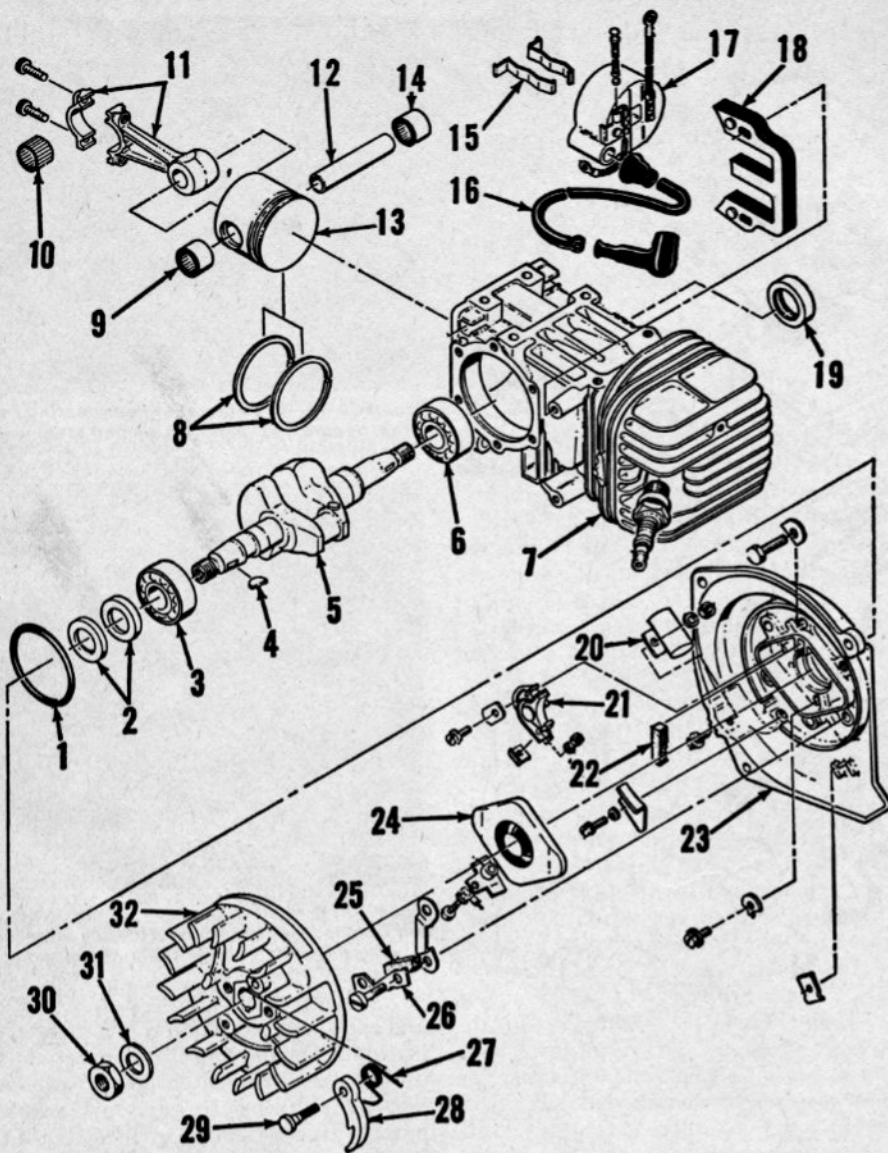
Exploded view of Model 940 power head assembly.
